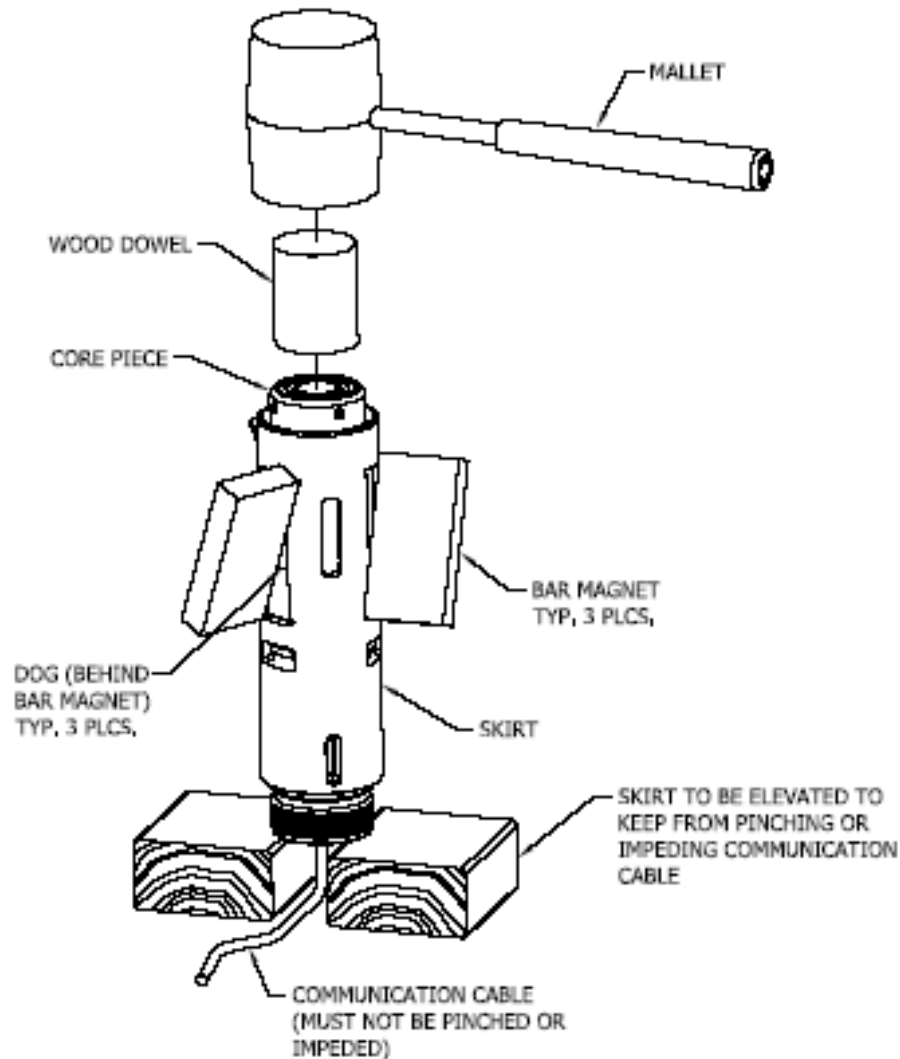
Technique for Assembling Dogs and Core Piece in ERS Skirt
